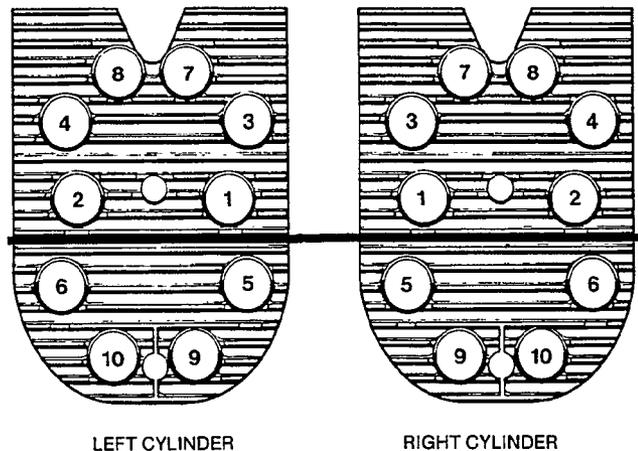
HEAD BOLT TIGHTENING SEQUENCE
